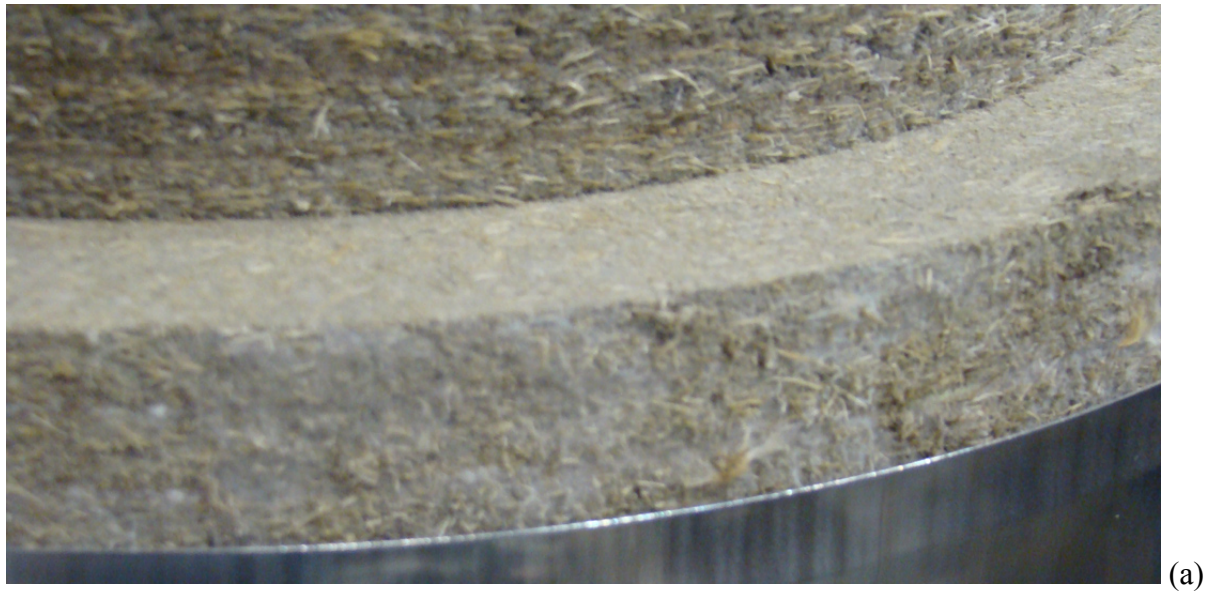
Mold on 9975-01818 upper fiberboard assembly. Photographs provided by NMM (Hackney).
